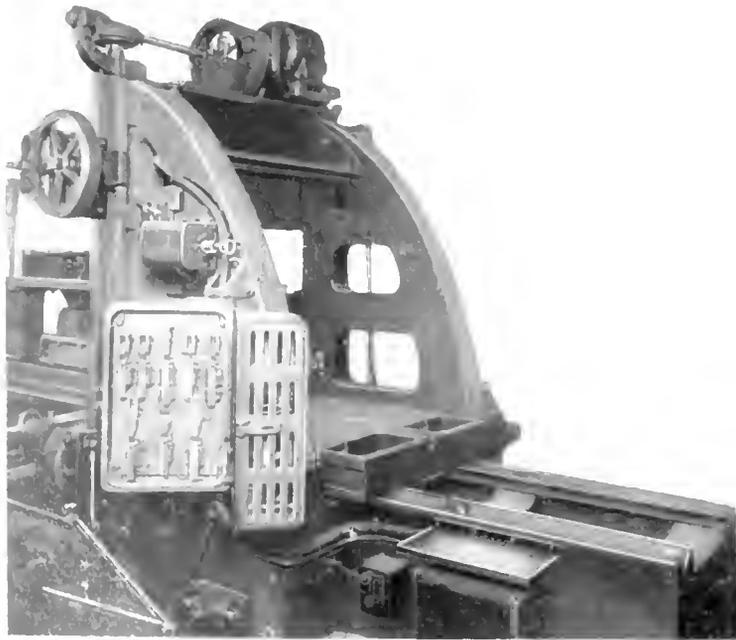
Planer, 48 in. by 12 ft. driven by a 20 h.p. 250 1000 r.p.m. Reversing Motor
